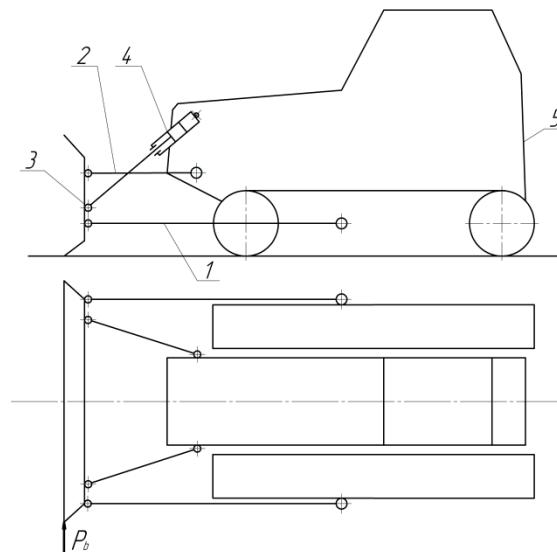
Kinematic diagram of bulldozer working equipment: 1 - push bar; 2 – strut; 3- moldboard; 4 - hydraulic cylinder; 5 - tractor base
